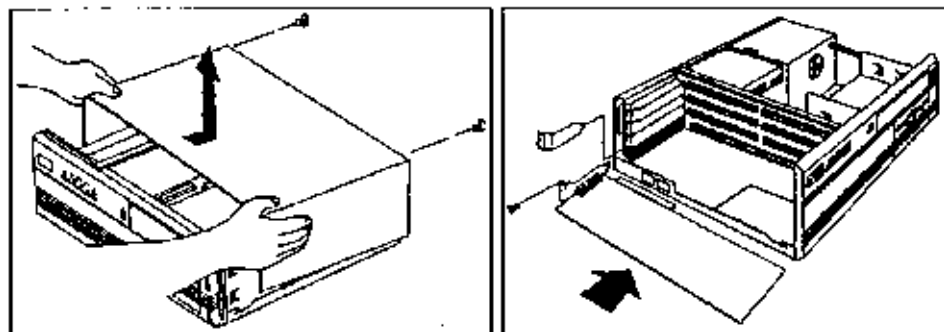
A4000 Disassembly and Expansion Card Installation
